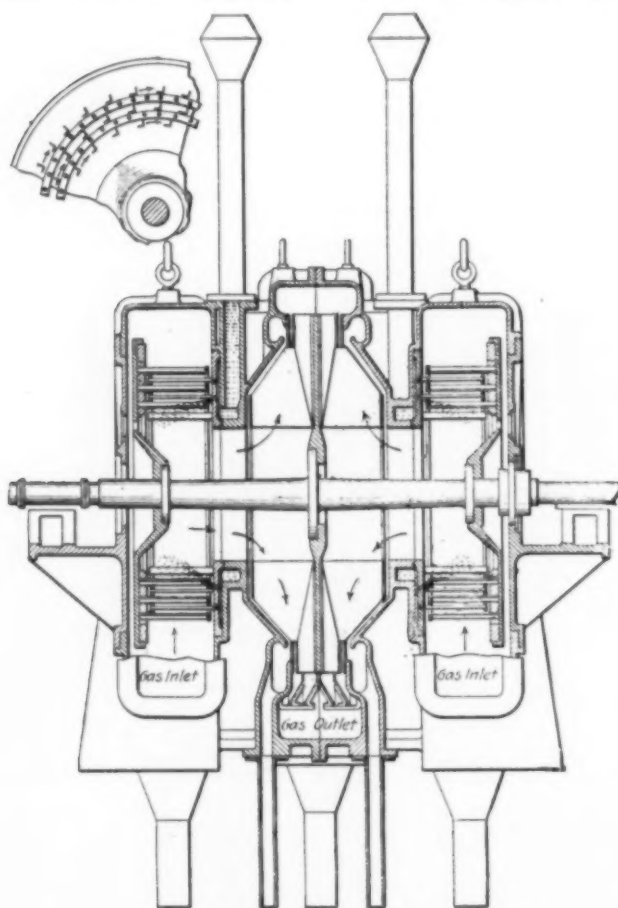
THEISEN DISINTEGRATOR GAS WASHER
